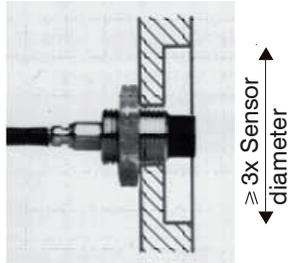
Example of flush assembly of an unshielded sensor in a metal support
